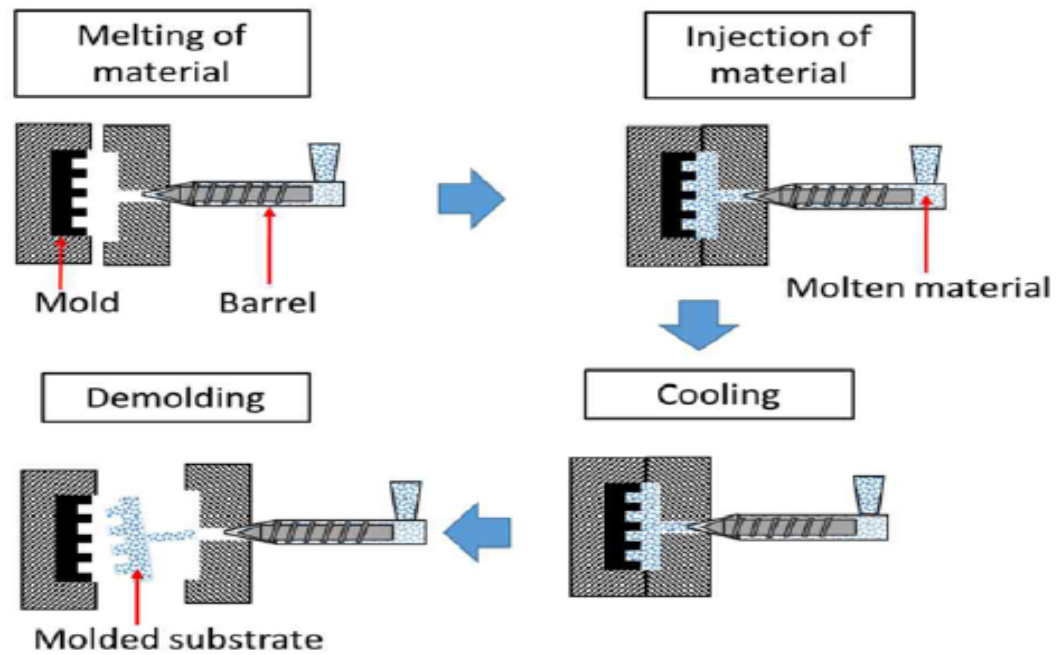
Demonstration of the injection moulding process (Saha et al., 2015). The principal steps are: Melting the material before the mold is injected with material, with both halves of the mould closed; injection, where the material is injected through a hopper into the injection moulding machine; cooling, where the system has to cool down; and the final step is Ejection, where the substrate is ejected from the machine.
